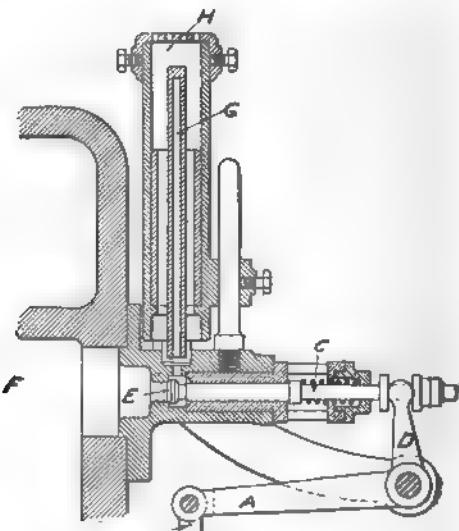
A Hot Tube Igniter, with a Geared Timing Attachment for Regulating the Point of Firing. G is the hot tube enclosed with a cylindrical case having a perforated cap, H, at the top. The heat of the tube is maintained by a gas flame within the cylindrical case. The link, B, operates the levers, A and D, so as to open the valve, E, which is normally held closed by the spring, C, bearing on its rod as shown. In opening the valve to the point in the cycle at which the cam actuates the link, B, thus compressing the spring, C, and opening the valve, D, the interior of the hot tube, G, is brought into communication with the combustion chamber, F, of the cylinder. The time of ignition may be varied by adjusting the throw of the cam, so as to bring the opening of the valve, H, to any desired point.
